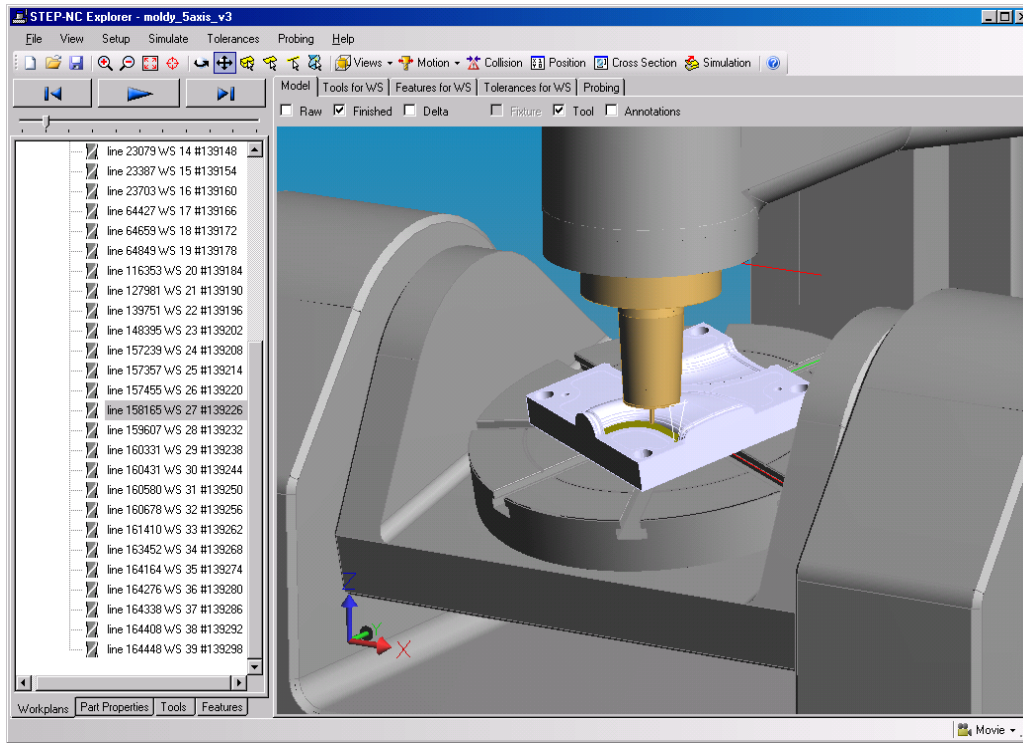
Subject mold part imaged in STEP-NC Explorer
